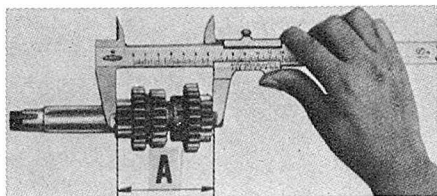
Distance (A) should be checked if counter shaft is disassembled. Refer to text for proper length.
